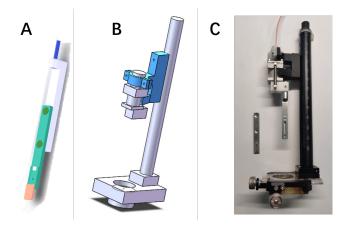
The assembly drawing of the modified micromanipulator. (A) The probe holder with a homemade dovetail groove(in orange). (B) The 3D-print connector (in blue). (C) The assembly of the probe holder, the tower and the hydraulic propeller.
